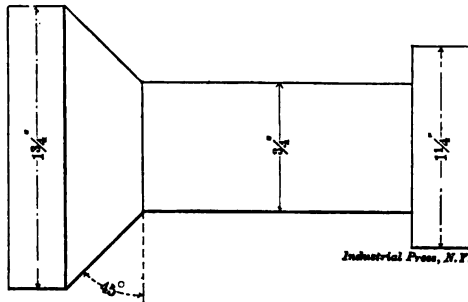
Example of Work for which Forming Tool Dimensions are to be Computed.
